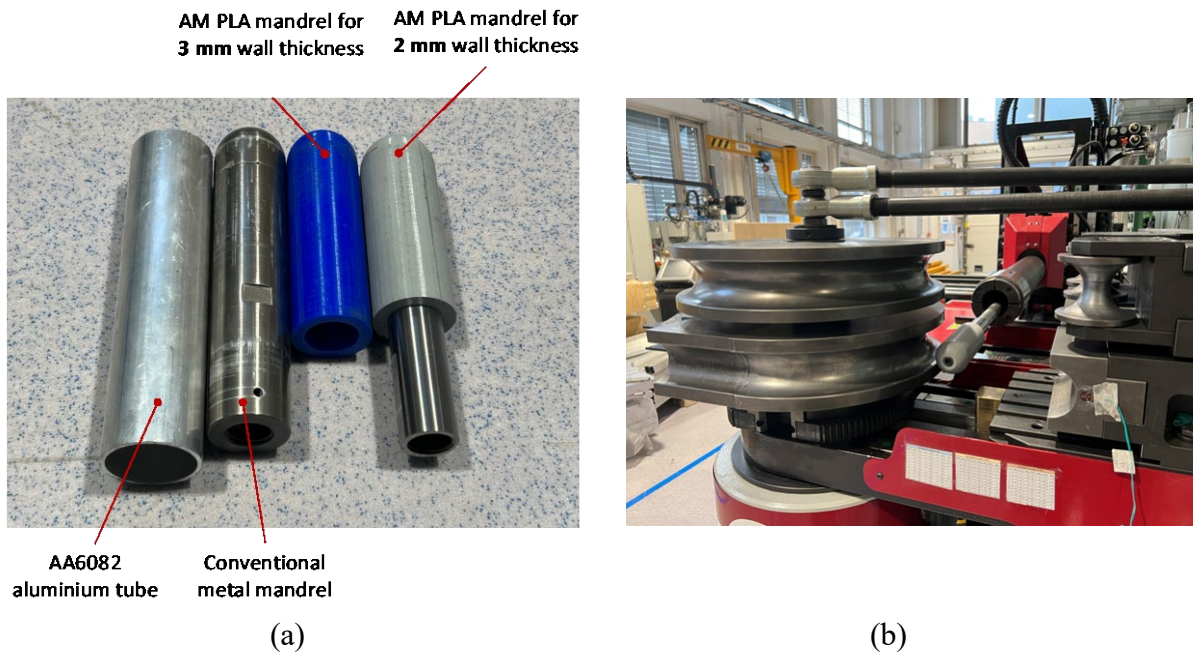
(a) AM PLA mandrels and conventional metal mandrel, and (b) assembled tooling in the RDB tooling system.
